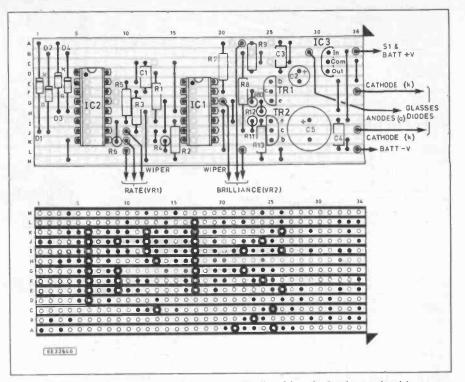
Stripboard component layout and details of breaks in the underside copper strips.
